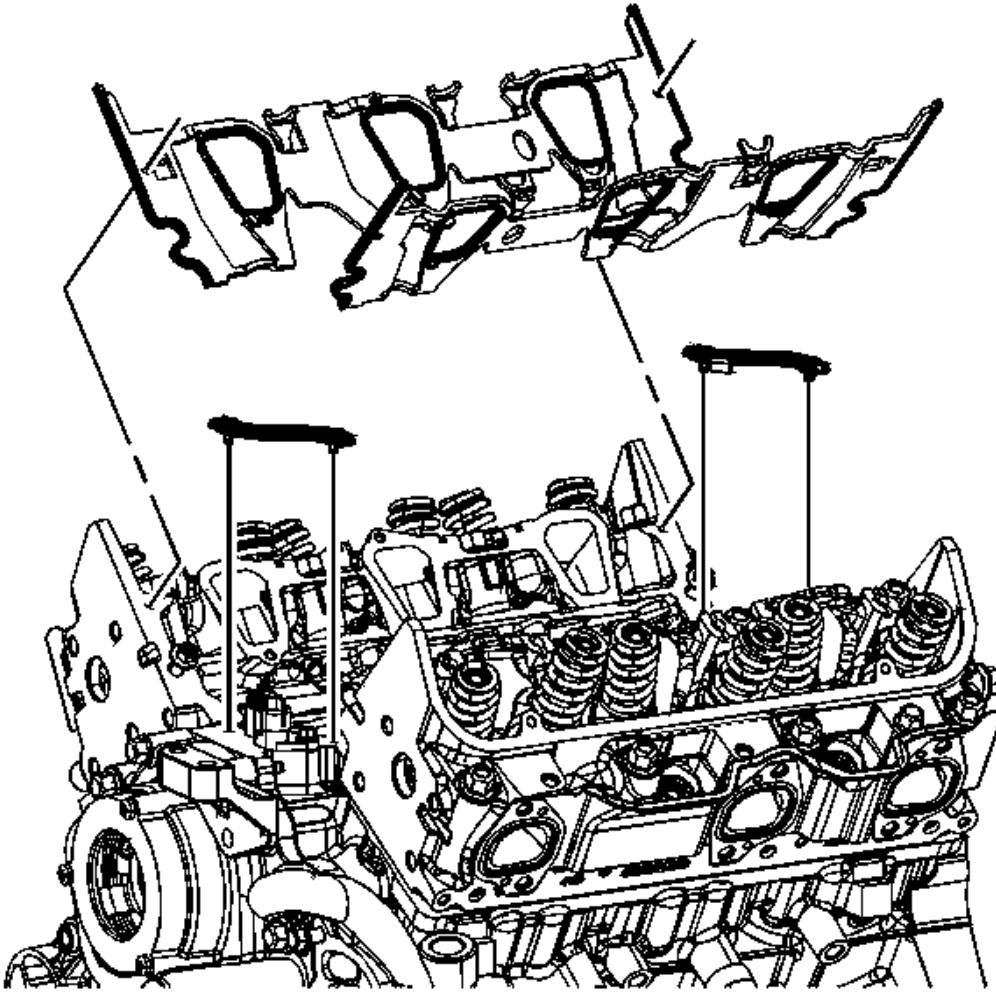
Identifying Intake Manifold Gaskets & Seals
